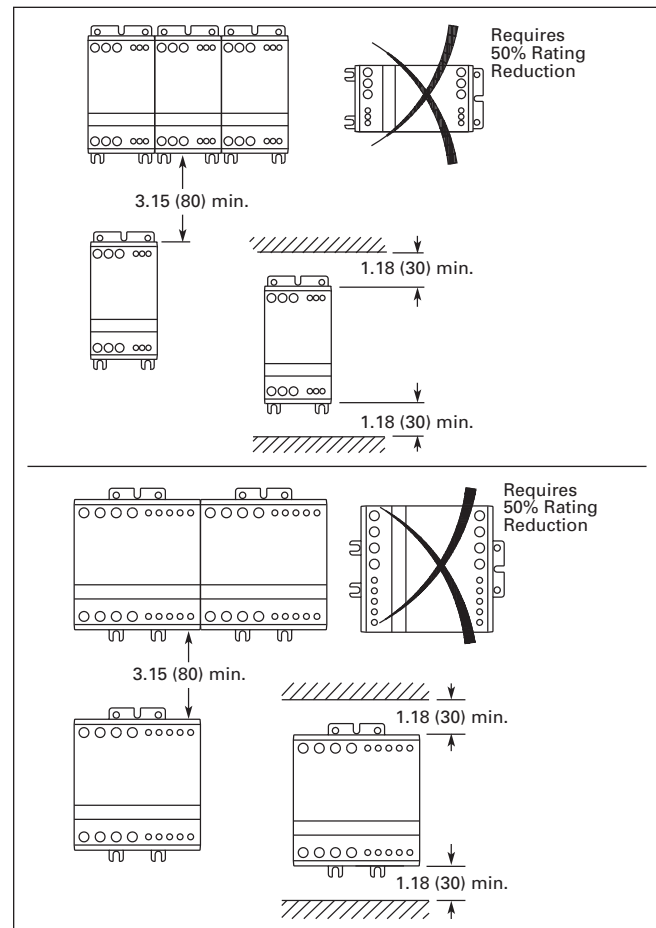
Recommended Mounting Distance in Inches (mm)
